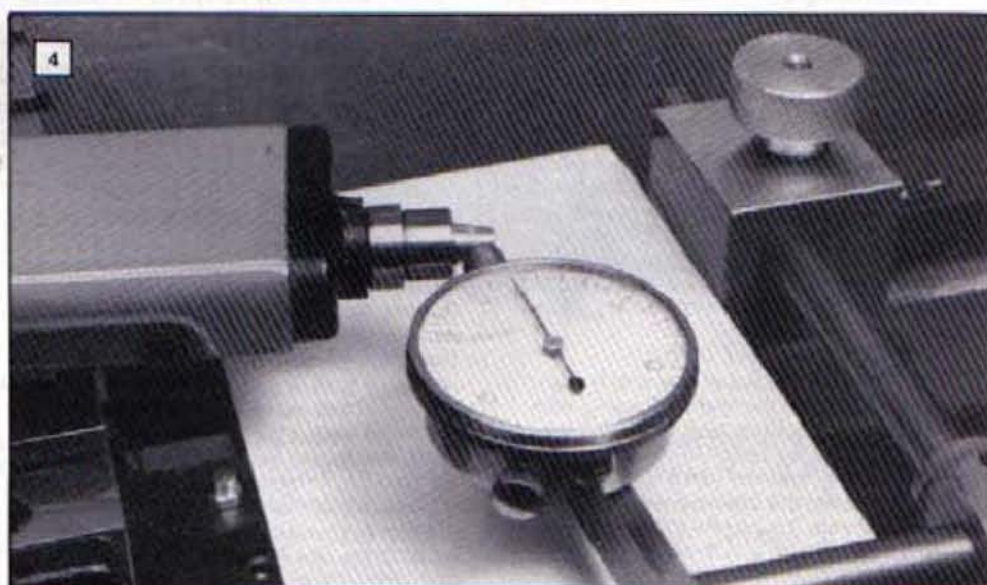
Spring parting tool with concave ground blade. Photo 3. Drilling the centre hole. Photo 4. Setting the top slide for boring the taper; dial indicator is set up on the lathe bed.
